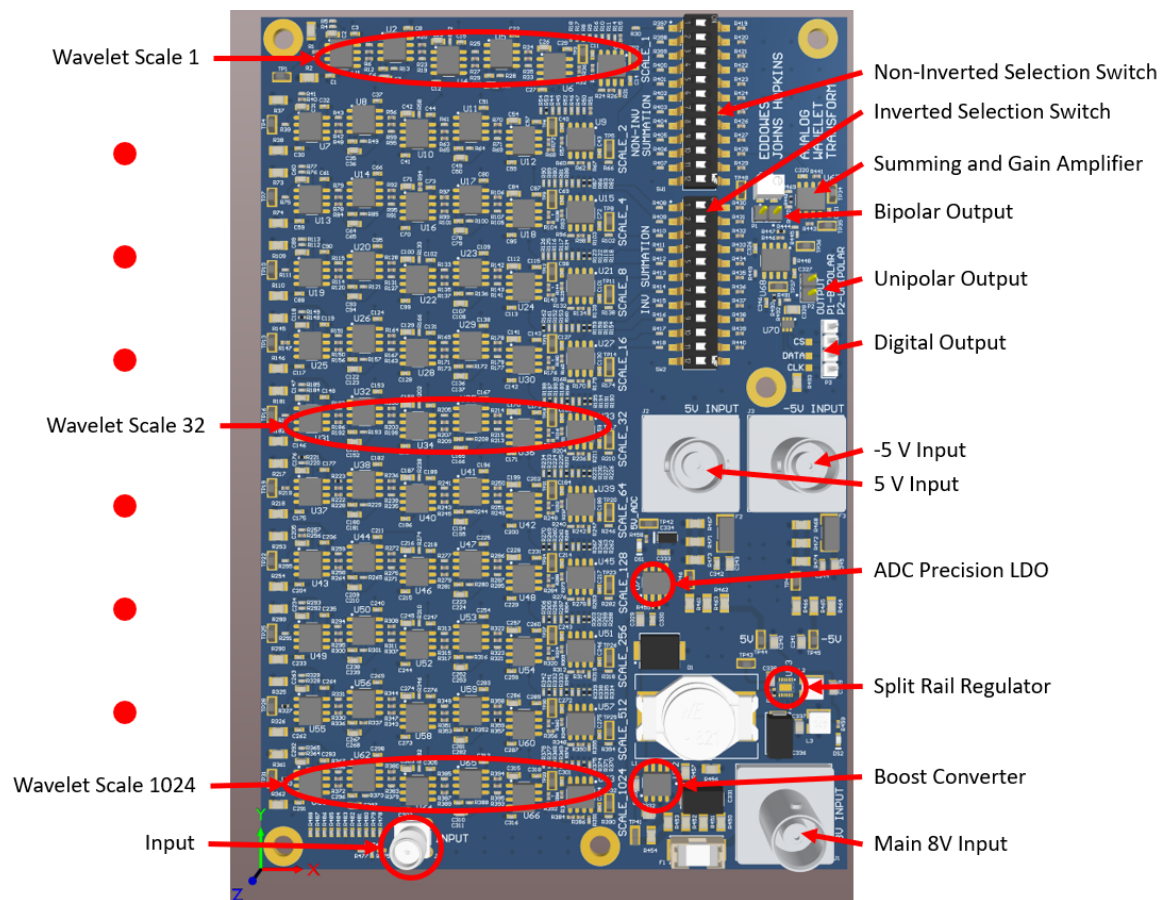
Rendering of the final PCB Layout. PCB schematics, layout, and 3D renderings all created in Altium.
